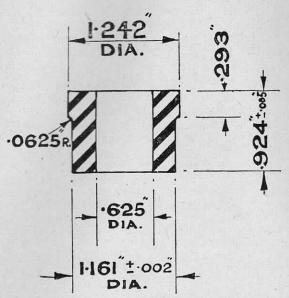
The dimensions of the lower wishbone bushes when in new condition.
